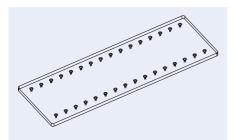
Microscopy slide through-hole platform – version with 32 fluidic interfaces
